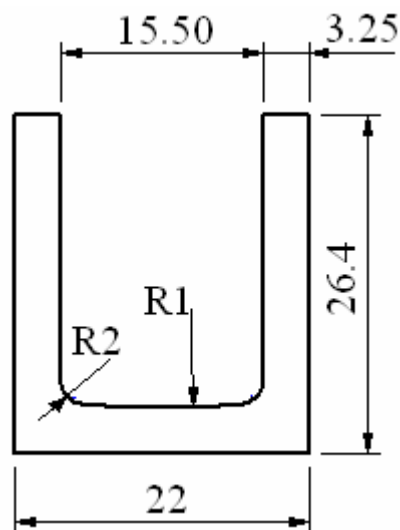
Geometry of the finished product (dimensions are in mm)
